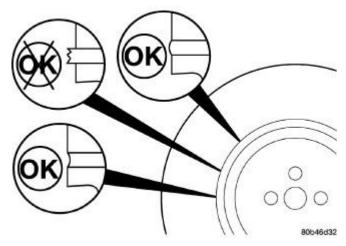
Inspect Damper Rubber Member Courtesy of CHRYSLER GROUP, LLC
